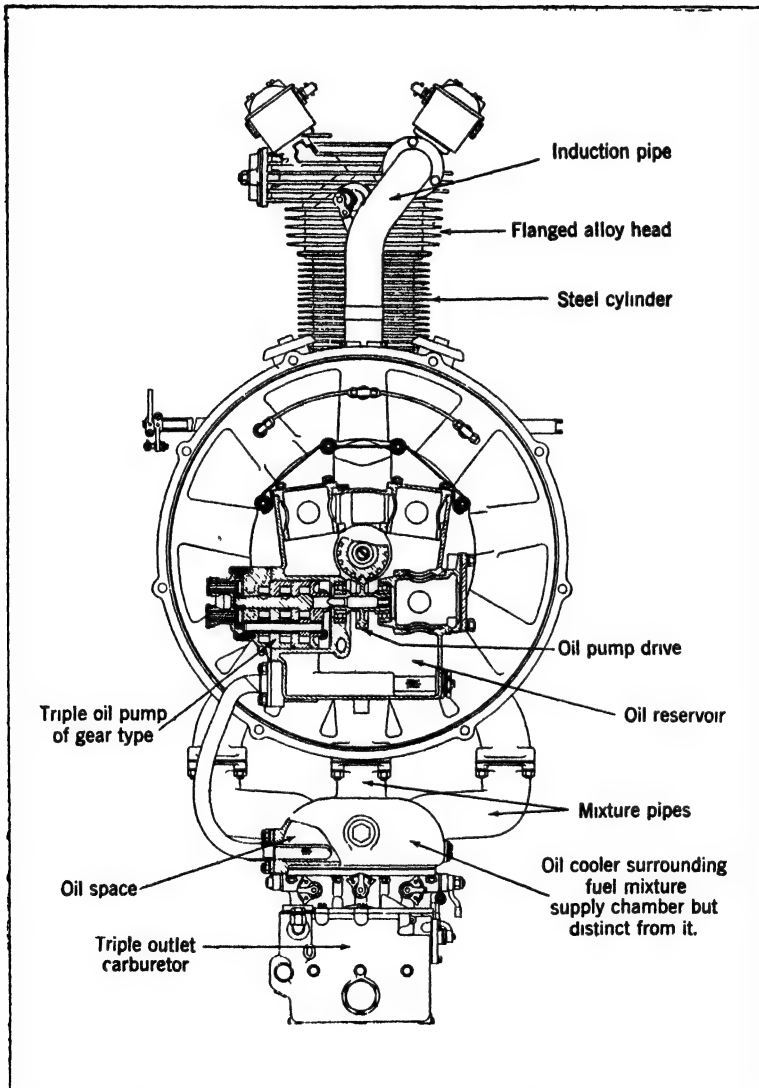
Diagram Showing Location and Method of Drive of Oil Pumps of the Wright "Whirlwind" Motor, and Use of Jacketed Induction Manifold for Cooling Oil.
